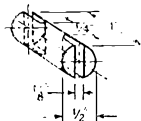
The spacing insulator for the driven element may be made from a piece of rod or sheet of Plexiglas or other good insulating material.
